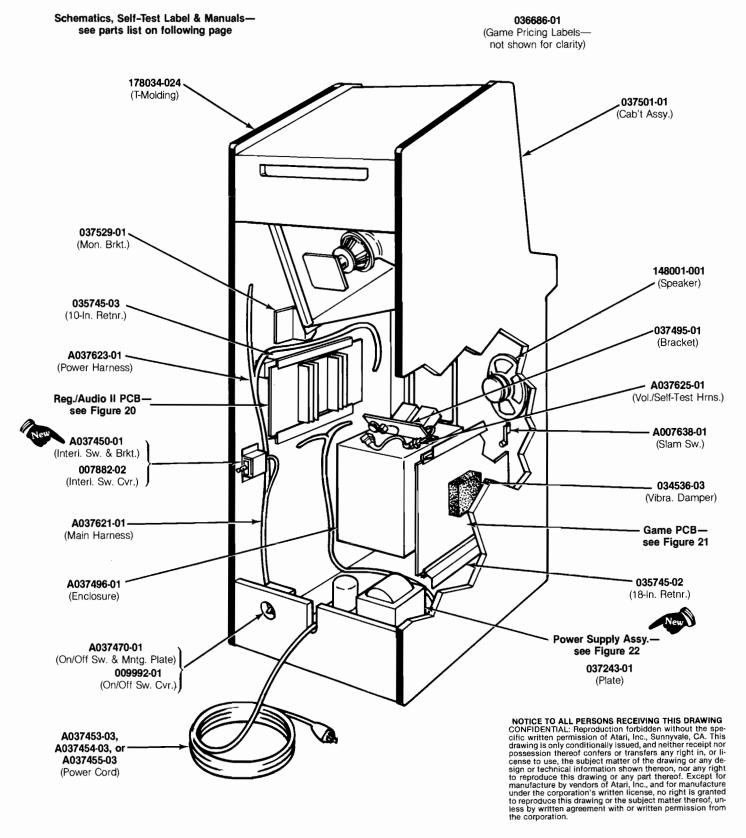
Cabinet-Mounted Assemblies A037500-xx F
